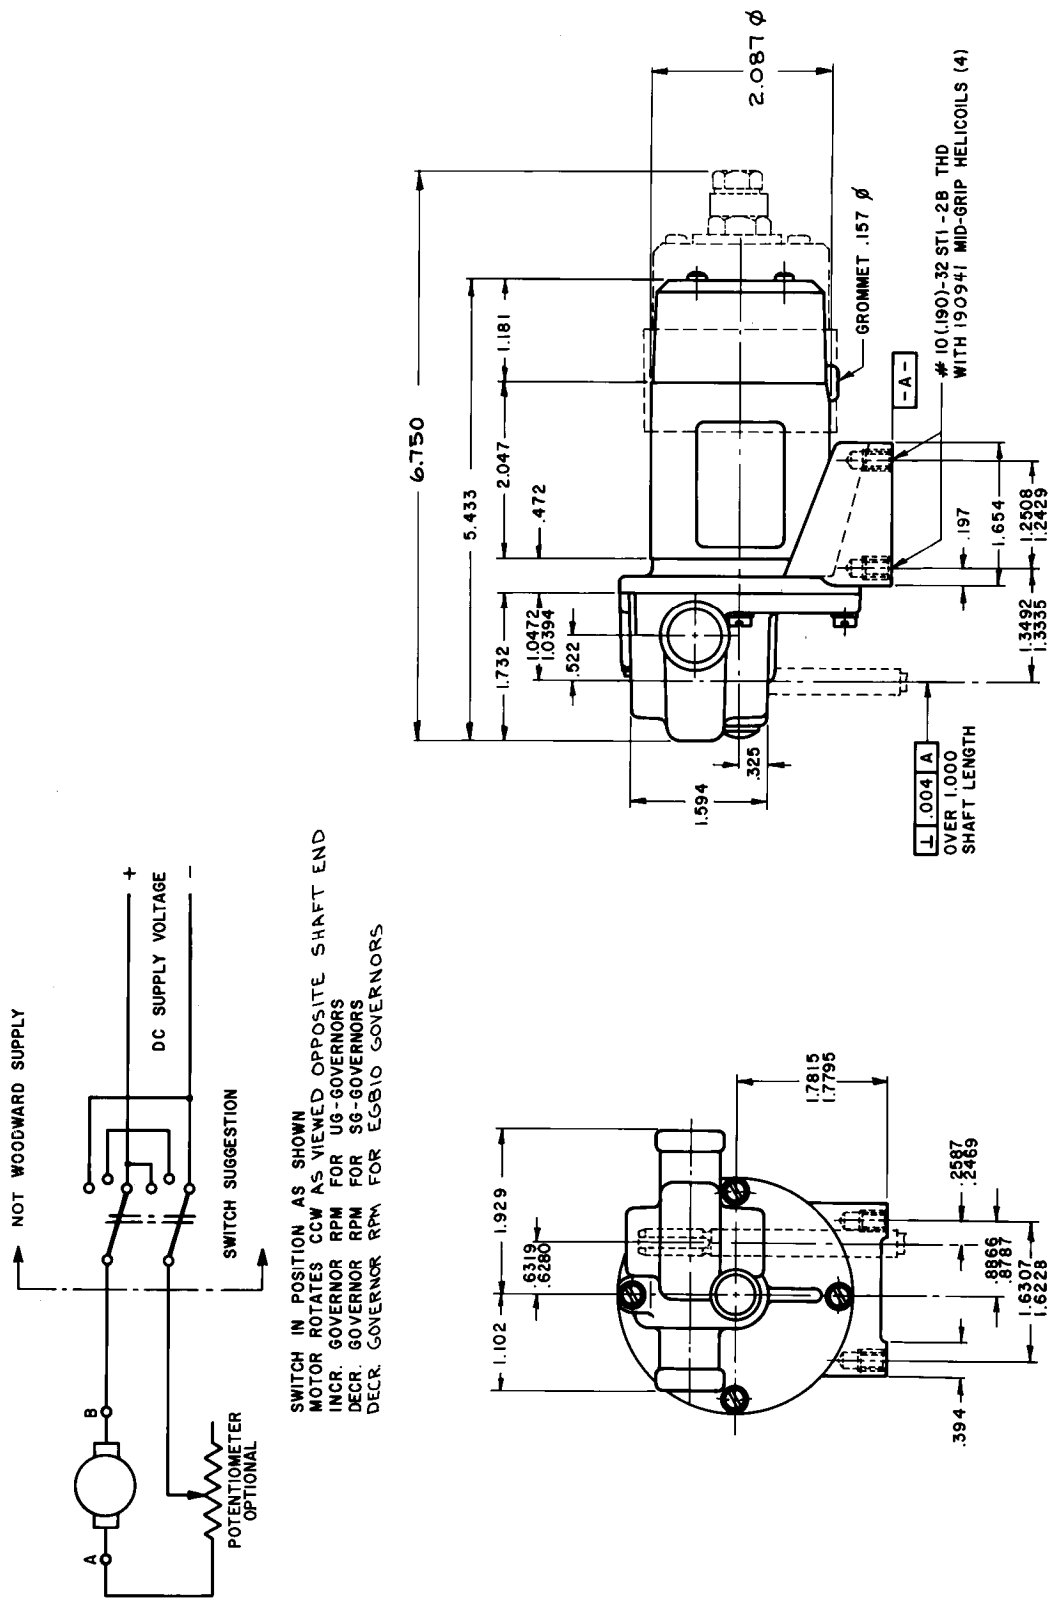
Outline Drawing of Groschopp Permanent Magnet Type Motor
